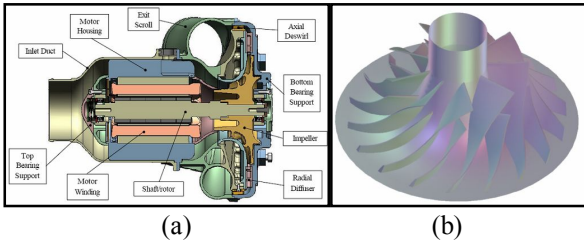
Centrifugal Turbo Blower ; (a) sectional view, (b) splitter impeller
